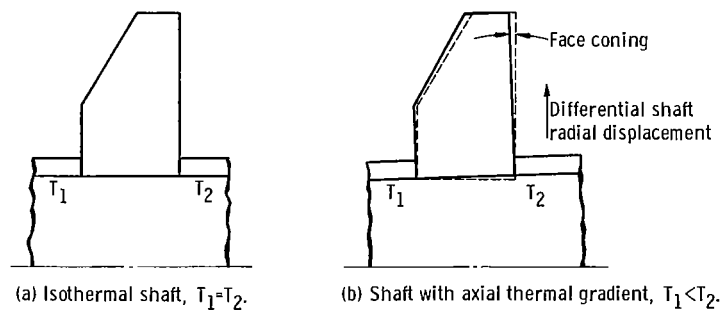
Coning deformation of seat due to thermal displacement of shaft.
